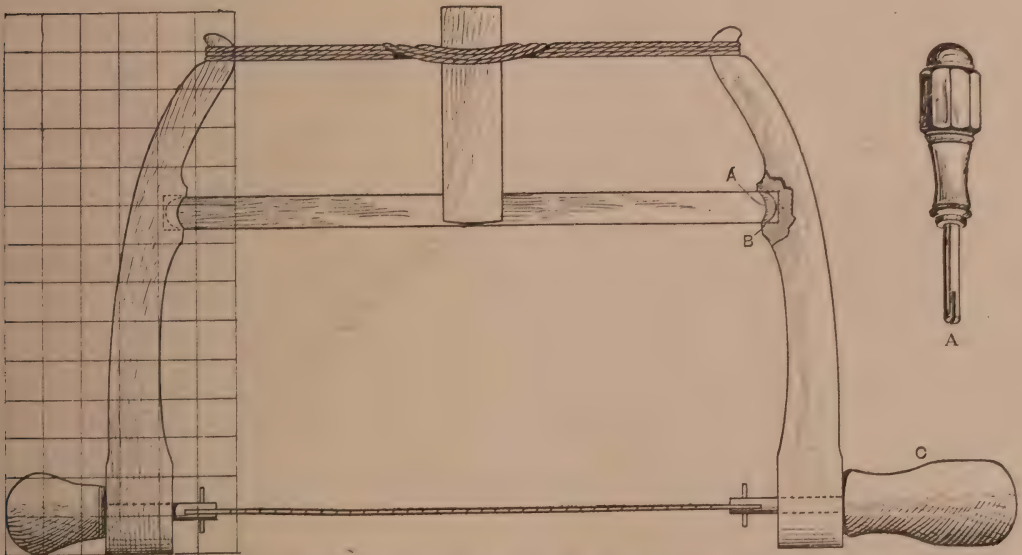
Details of Home-made Bow Saw; A, Alternative Design for Handle
